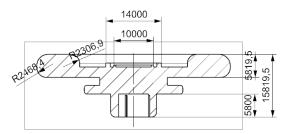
Side view of the counter weight with dimensions (mm) [own source].
